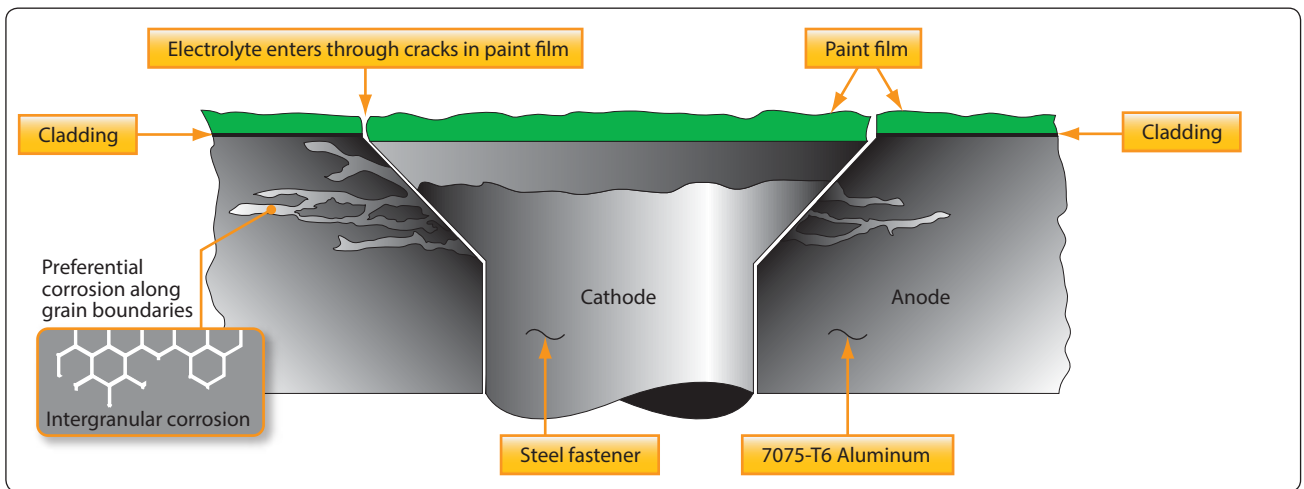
Intergranular corrosion of 7075-T6 aluminum adjacent to steel fastener.
